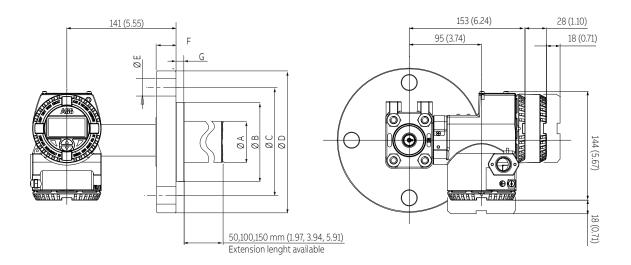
266DRH with DIN housing and direct mount seal S26RA/S26RE/S26RJ rotating flange Raised Face extended diaphragm
